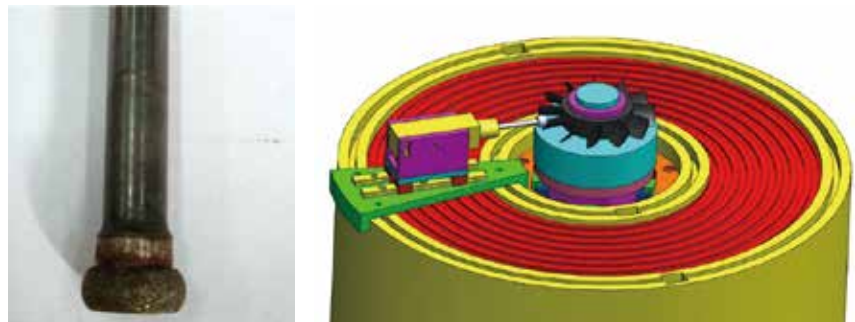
Principle of the spiral machine tool proposed by Beihang University
